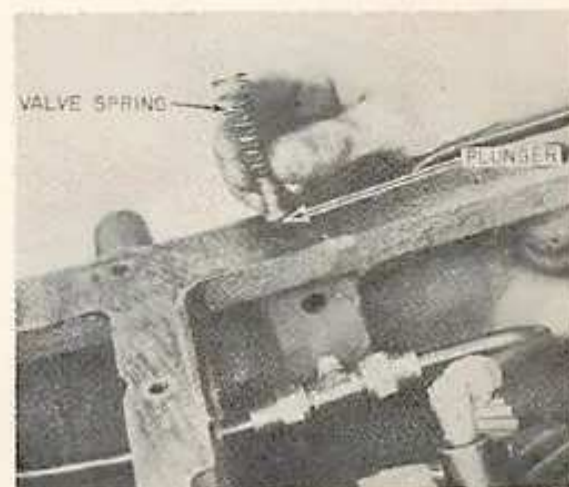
Transmission lubrication circuit by-pass valve removed from bore in rear main frame. Valve plunger and spring are retained by an expansion plug (not shown).
